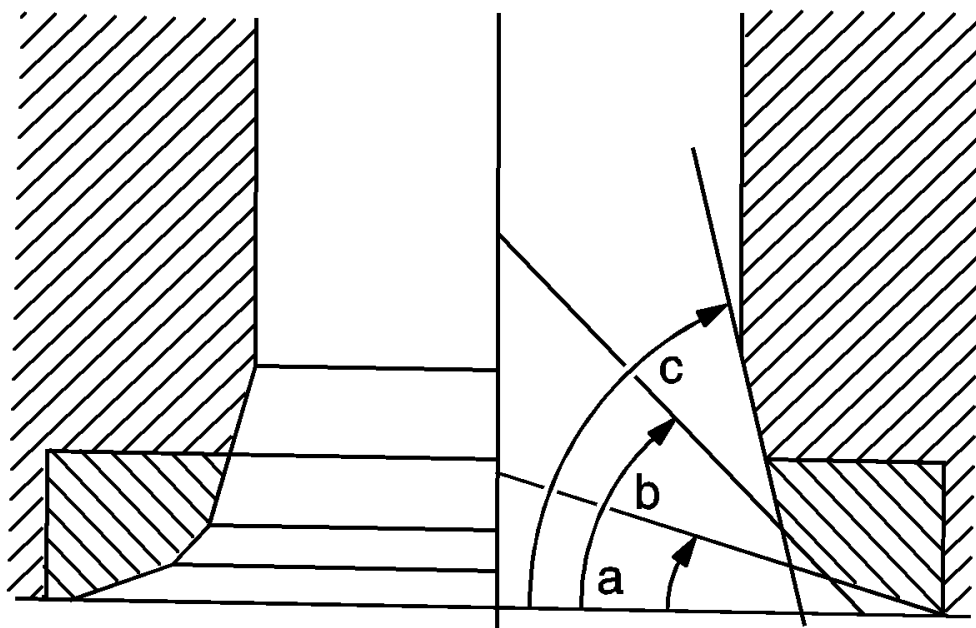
Identifying Valve Seat Angle, Upper Correction Angle, And Lower Correction Angle
